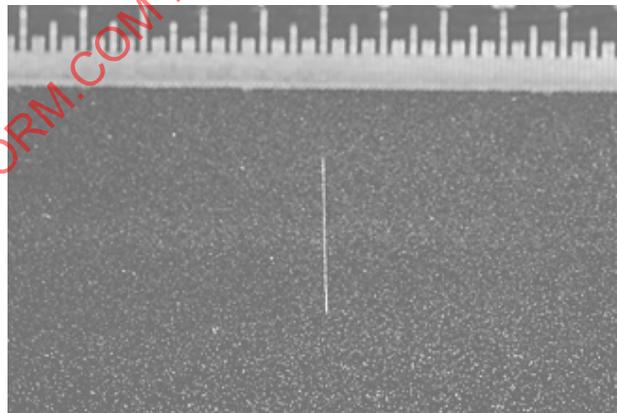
Example indication from a fatigue crack specimen. The indication is crisp and clearly discernible. Background fluorescence is low. Scale: major divisions: 2.5 mm (0.1 inch).
